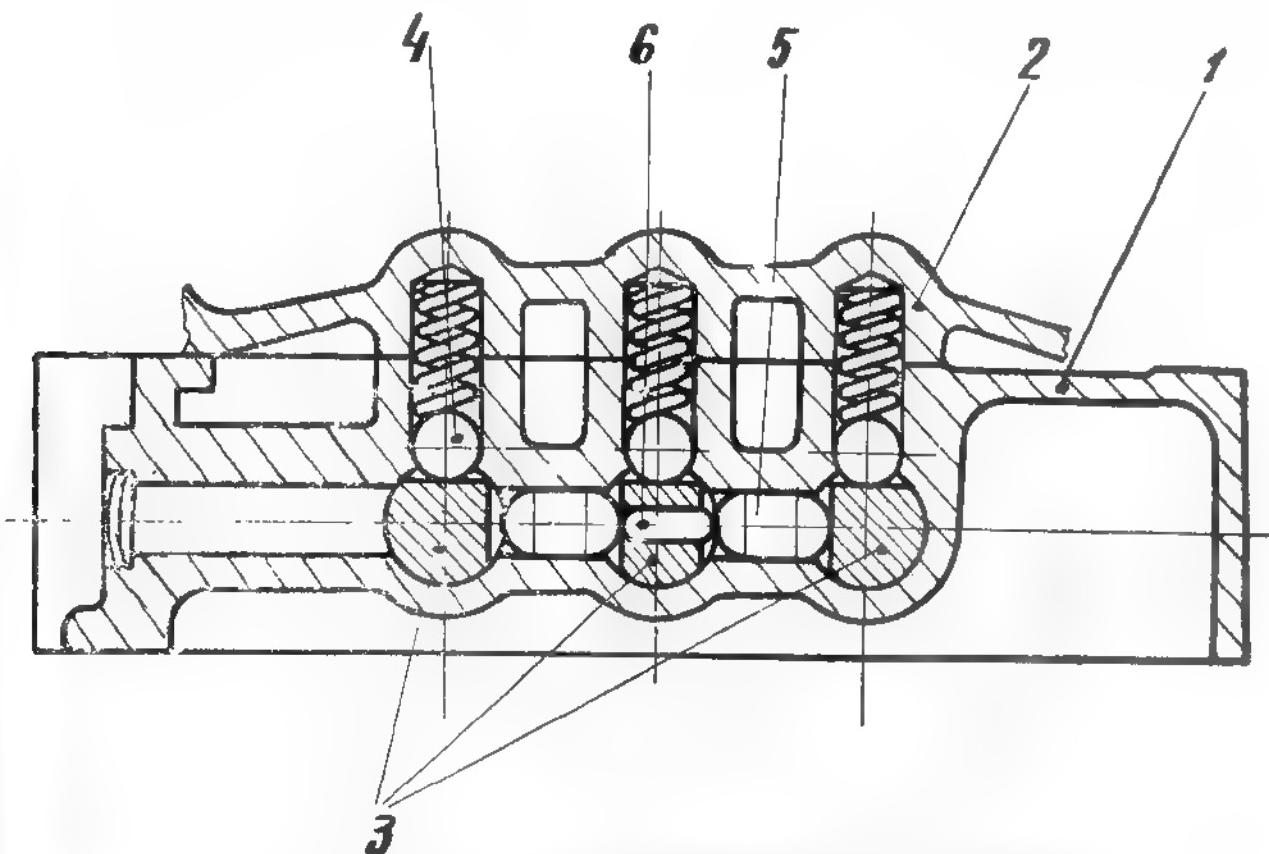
FORK SHIFTING SHAFTS' LOCKING SYSTEM
